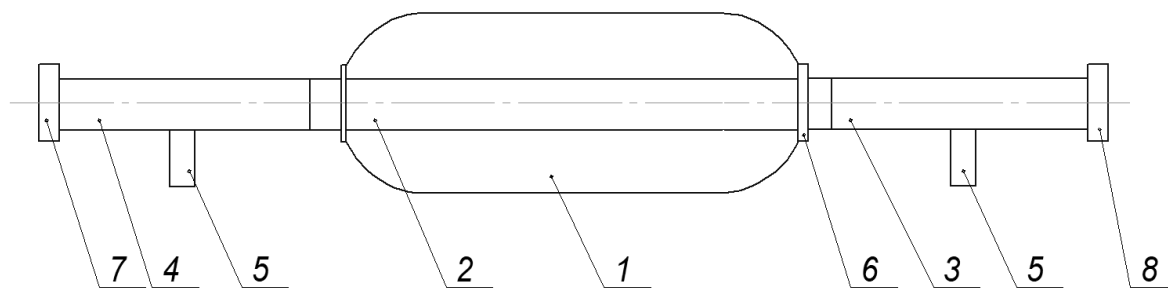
Mandrel design: 1 — Mandrel surface; 2 — mandrel shaft; 3 — support trunnion; 4 — drive trunnion; 5 — support (machine steady rest); 6 — flange holder; 7 — drive cam; 8 — support cam
